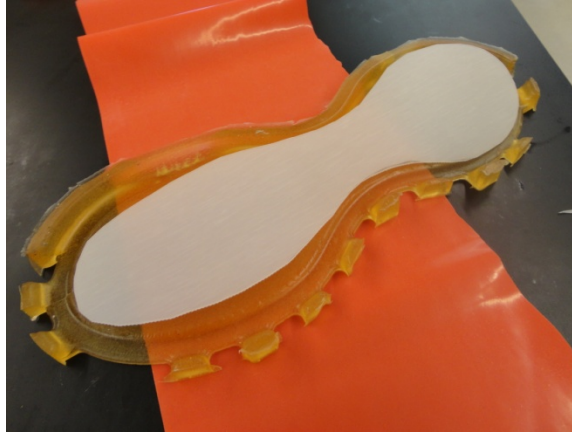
Components of final prototype, rubber material to contain parts, mold with beams and polyethylene layer
